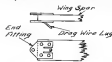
A drag wire lag formed by cutting two parallel slots in the main fitting and bending up the crimped strip.
